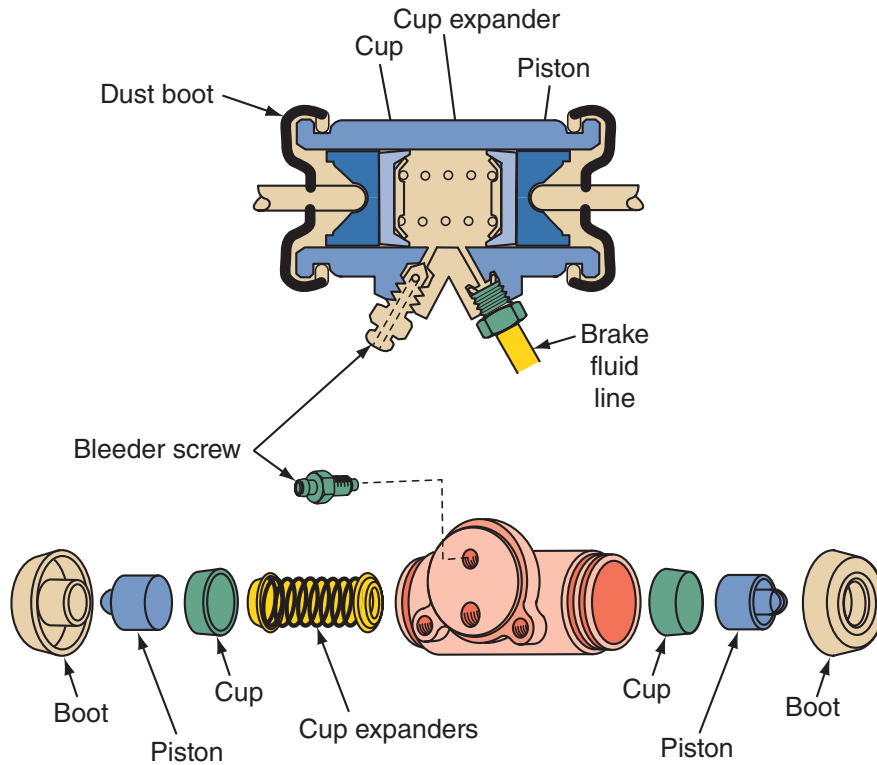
The exploded view of a typical wheel cylinder.
